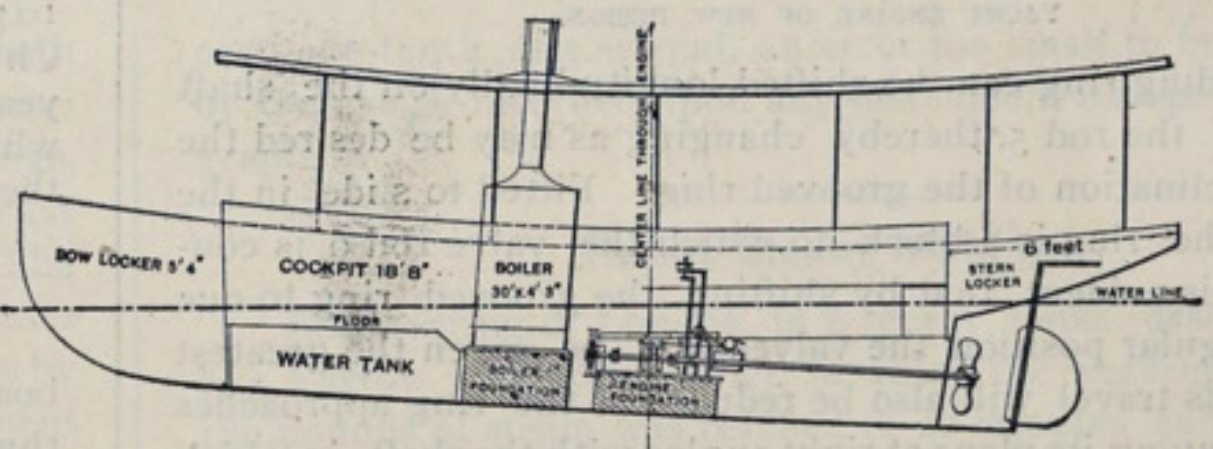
Cross and Longitudinal Section of Steam Yacht.
